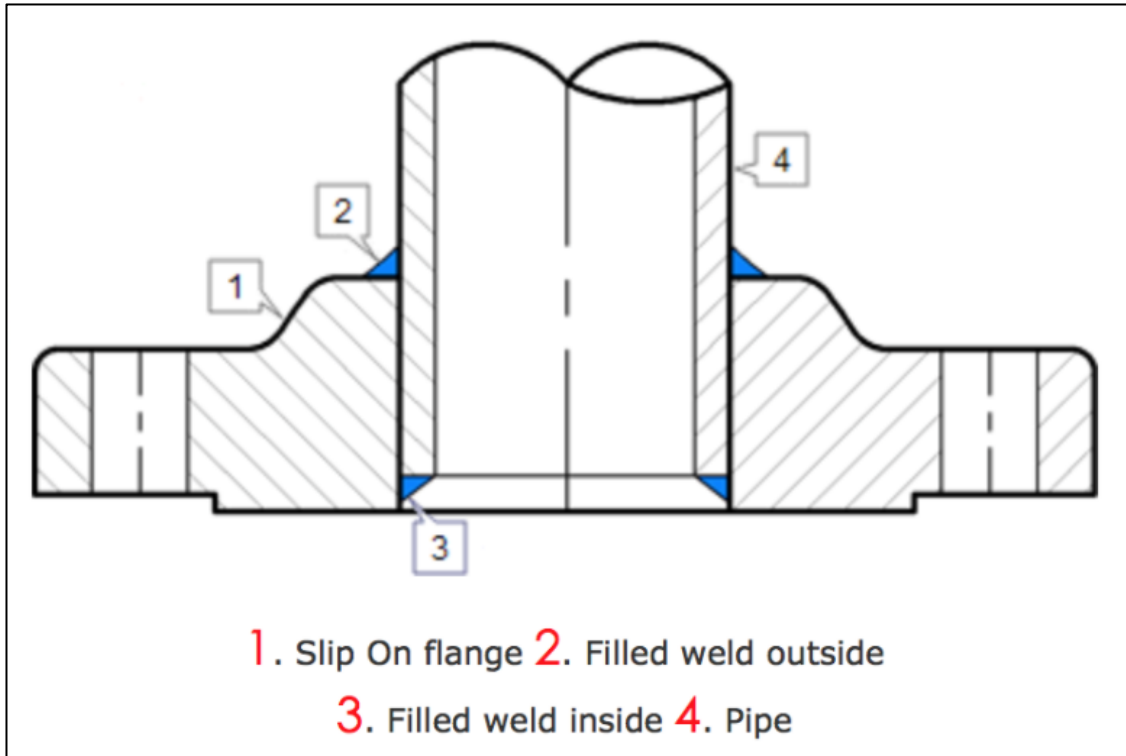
Section view of Slip-on Flange (Image Reference. engineeringlearn.com)
